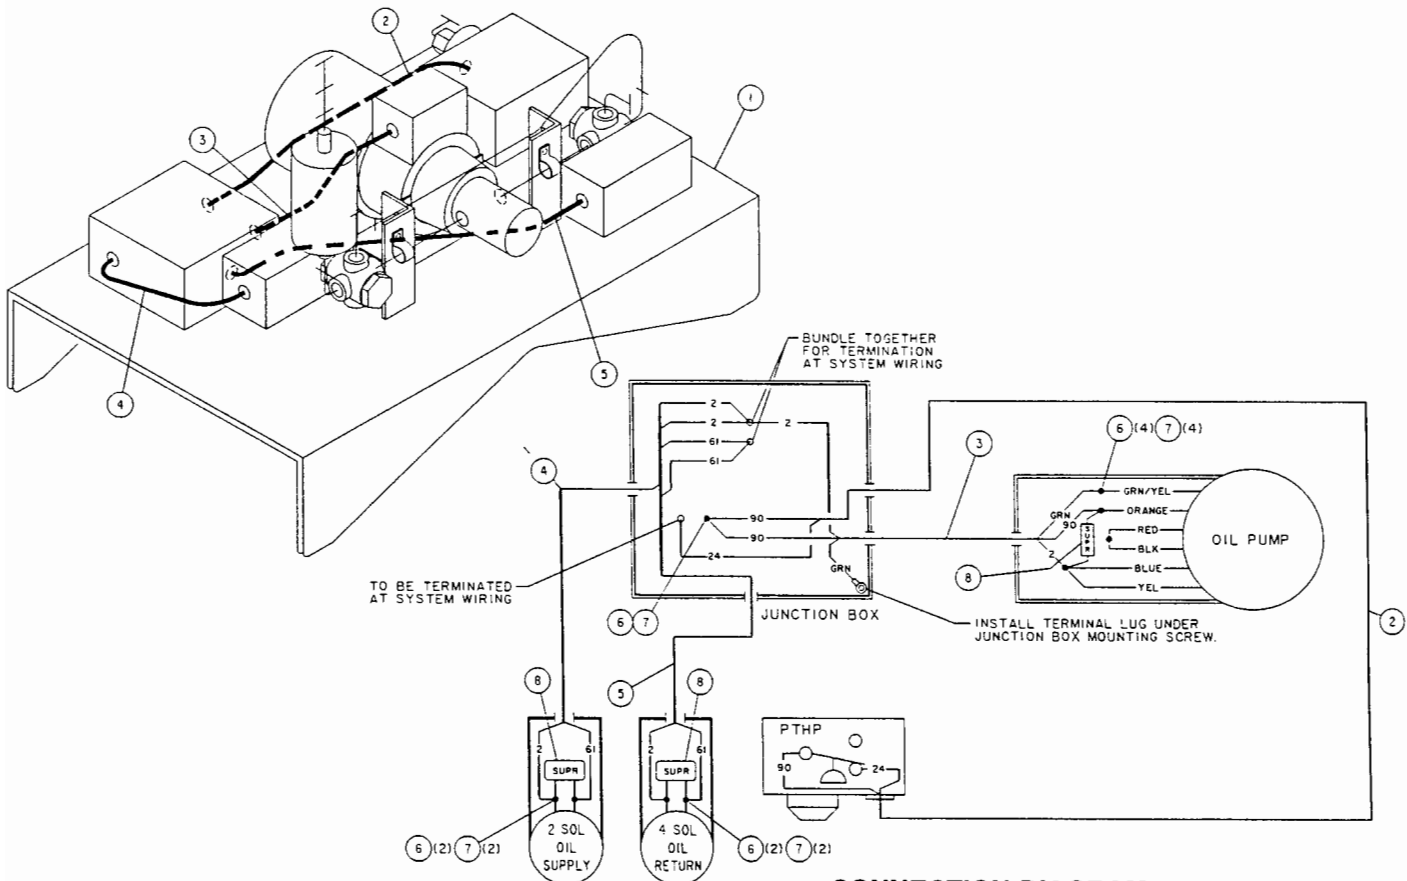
PUMP SUB-ASSEMBLY WIRING
